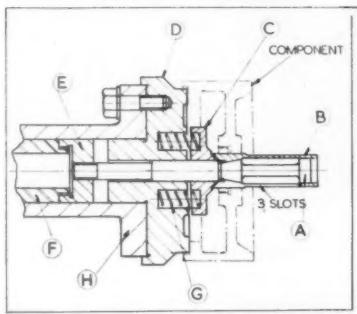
The expanding type collet and the friction imparted by the large disc is enough to drive the component if care is used when applying the feed
